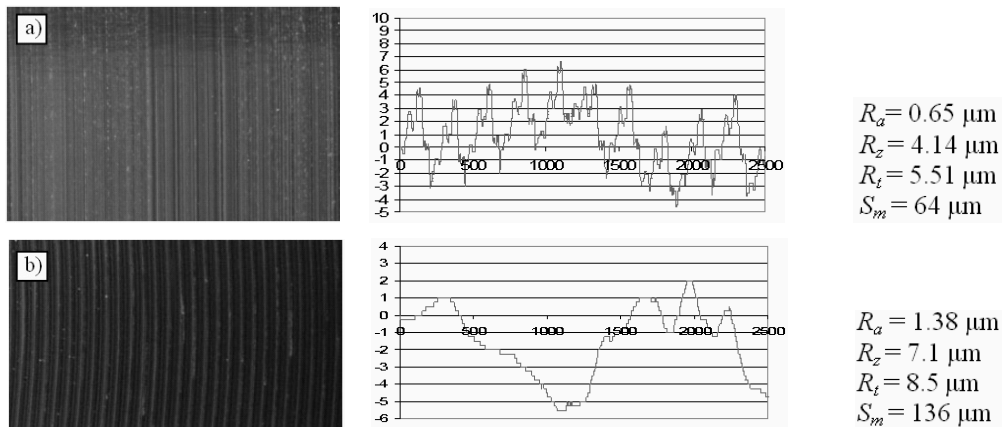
Geometrical structures of Cu sample butting faces prior to cold pressure welding: a) a planed surface, b) a milled surface
